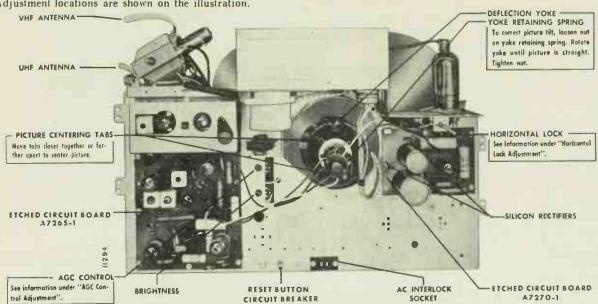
Rear View of Chassis 15UA2 Showing Adjustment Locations.
